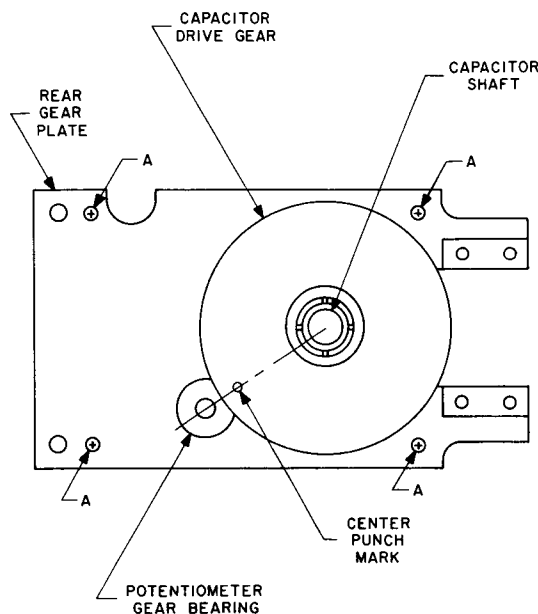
Capacitor Drive Gear, Alignment Diagram
